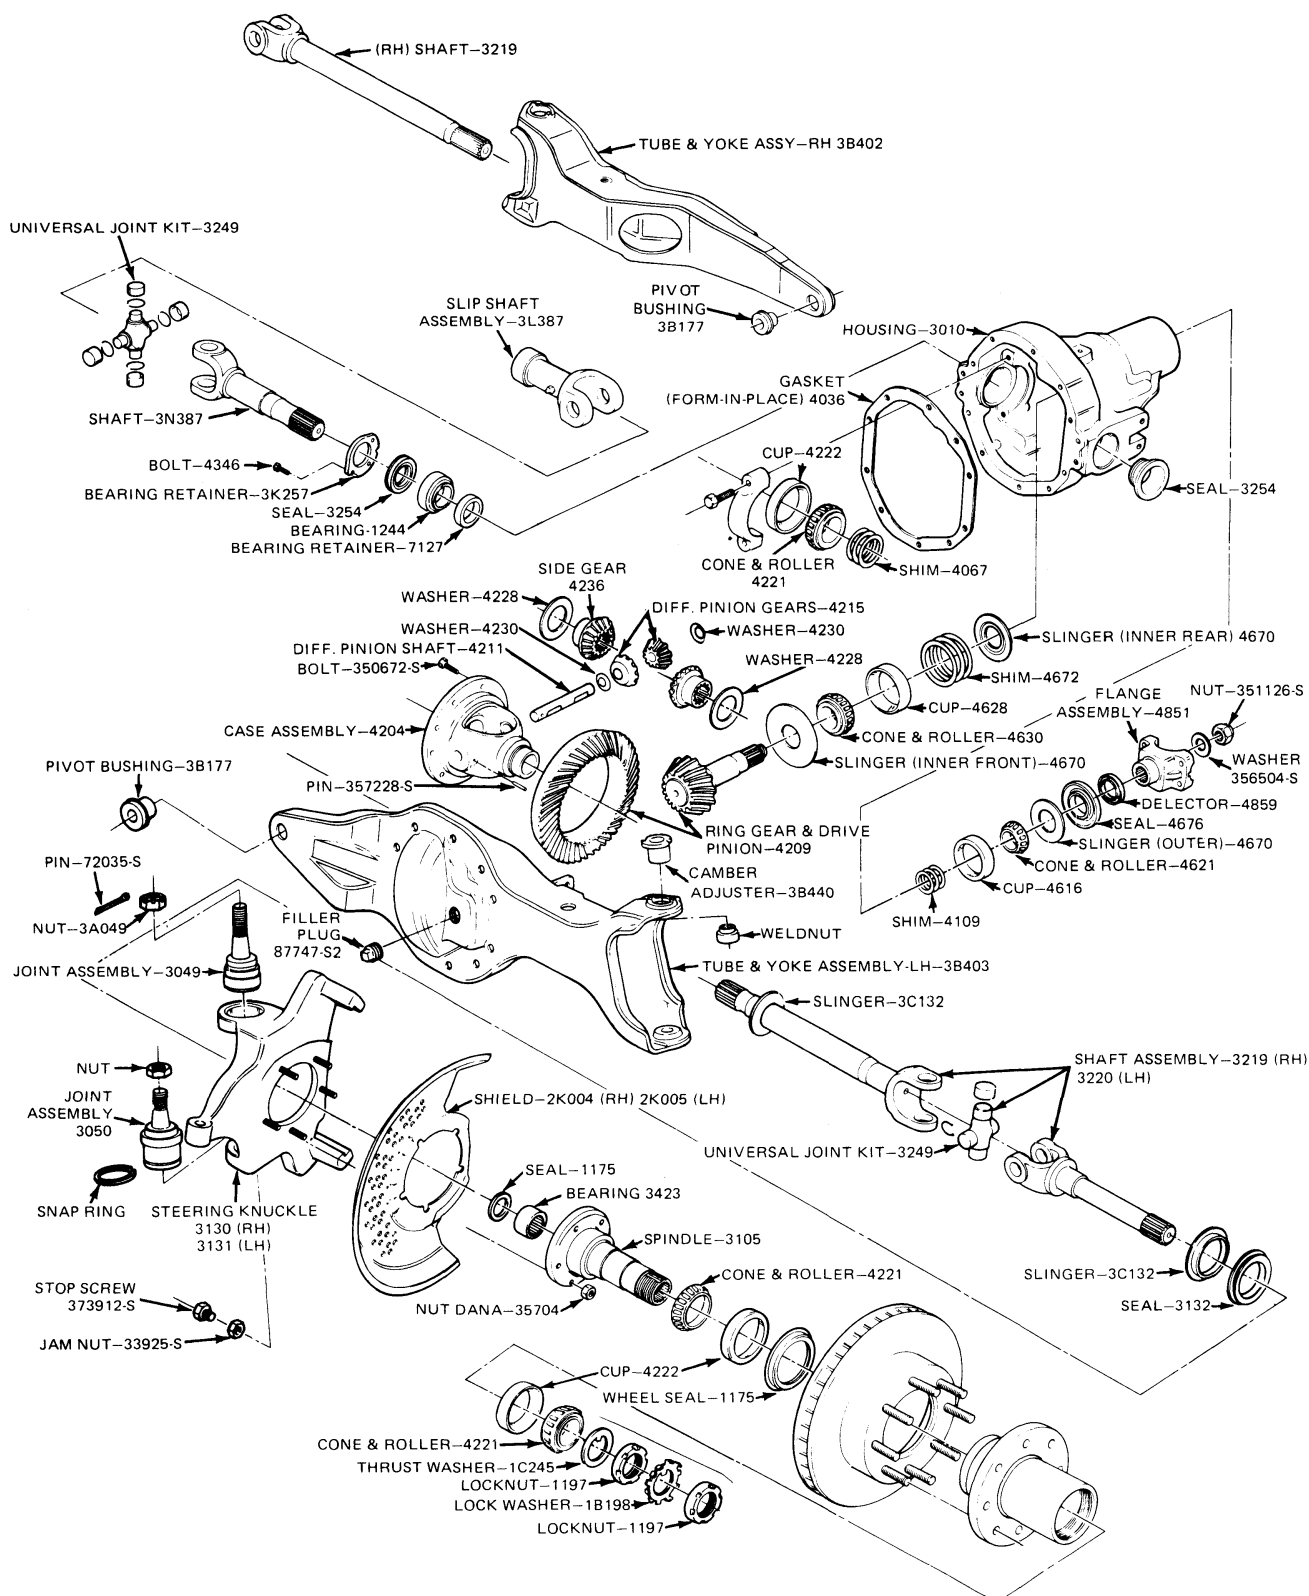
Dana 50-IFS-Front Drive Axle F-350
